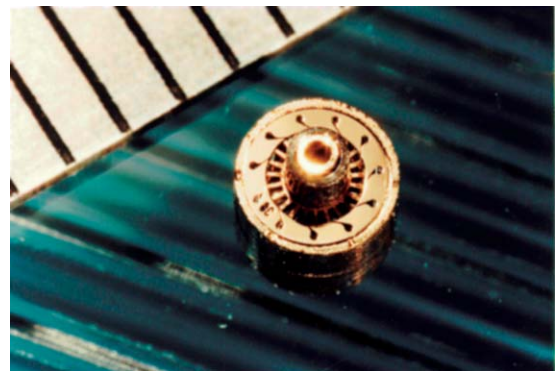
Assembled turbine system; for visualization the sealing cover plate is still missing.
